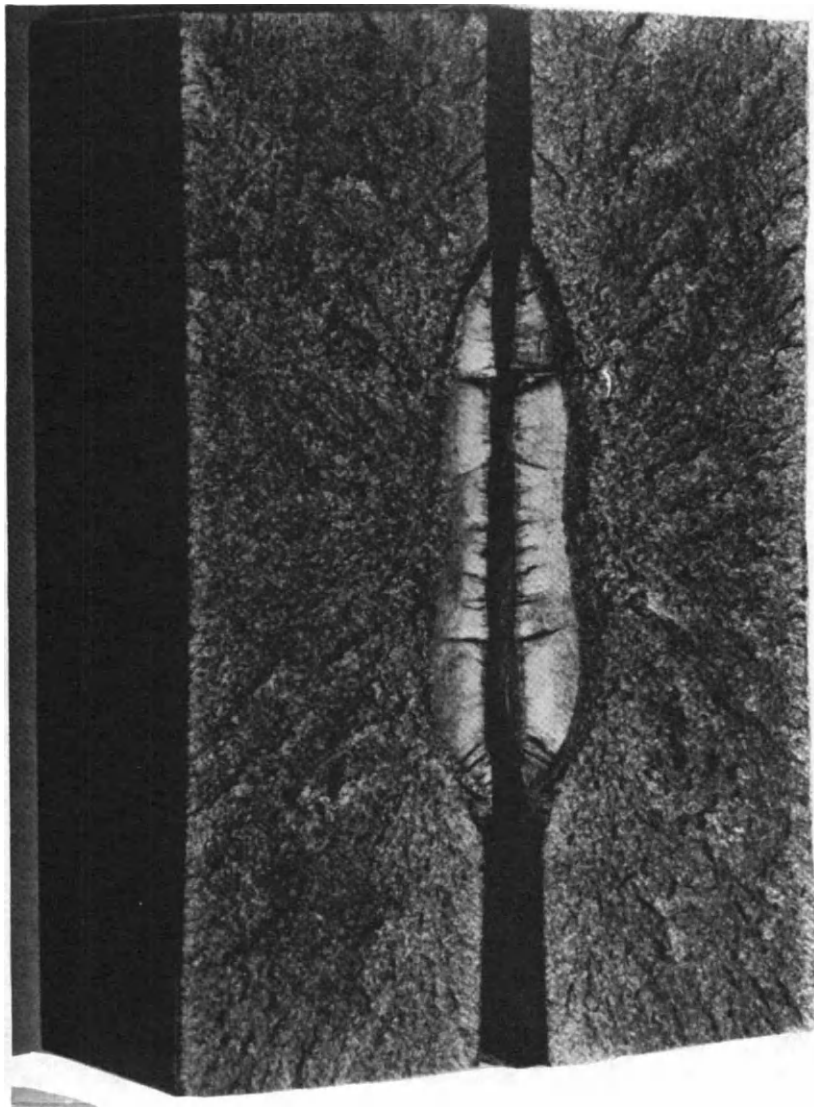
Fracture surface of a specimen in which fatigue cracking was followed by brittle fracture.⁽¹¹⁰¹⁾
